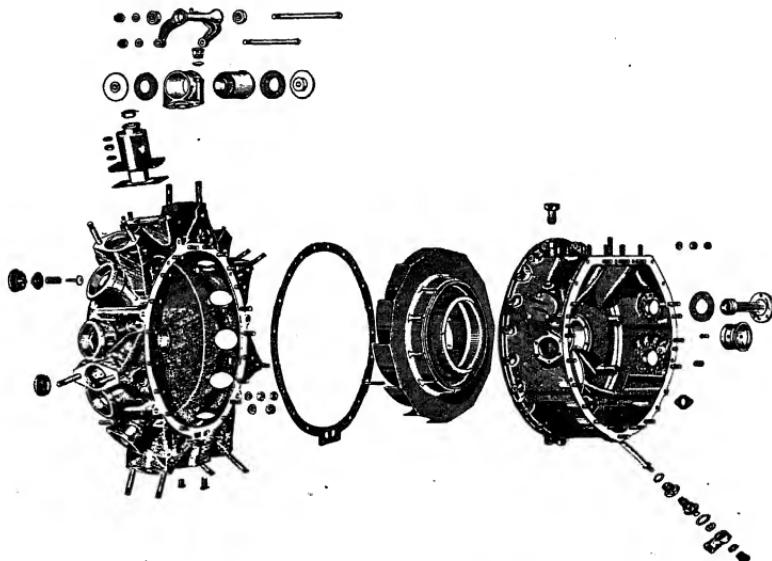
Assembly of supercharger housing and diffuser plate.
